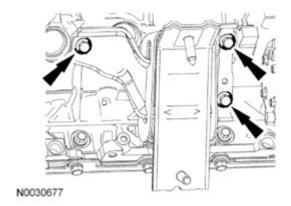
Installing Engine Lifting Bracket Set Courtesy of FORD MOTOR CO.
